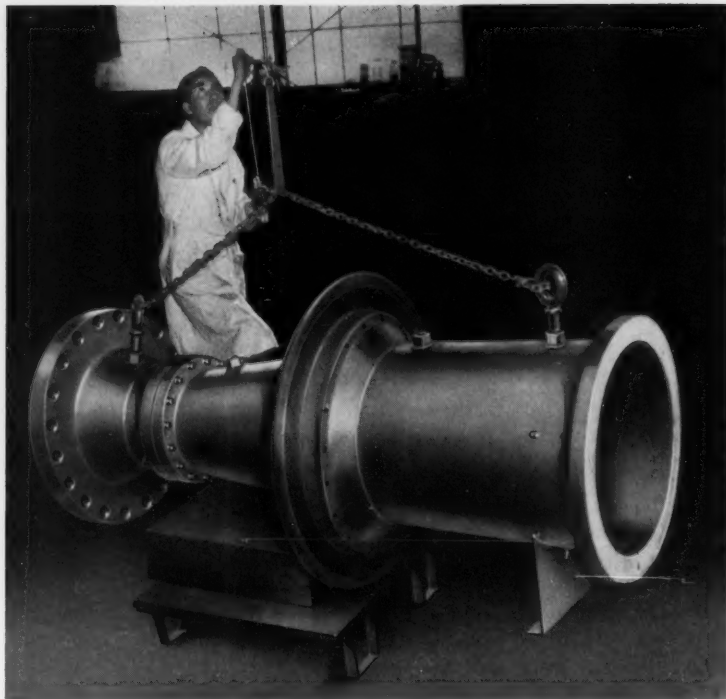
The internal surfaces of the big cylinder-like component shown here were nickel finished by sealing one end of the part and then filling it with an electroless plating solution.
